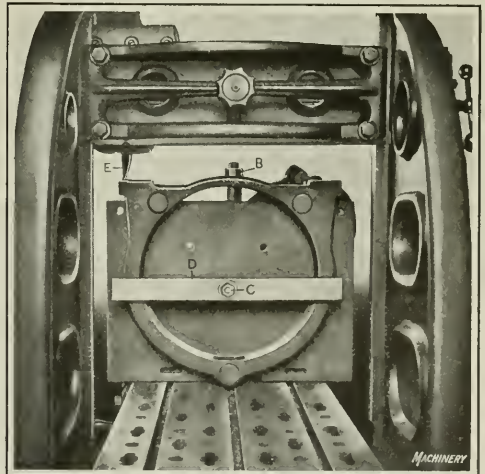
Opposite Side of the Work and Fixture for planing Stock Reel Supports
